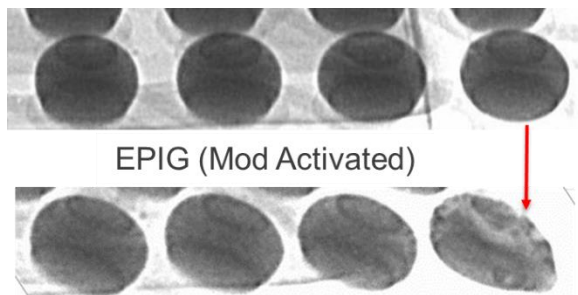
X-ray imaging of modified EPIG solder joints before and after electromigration test.
